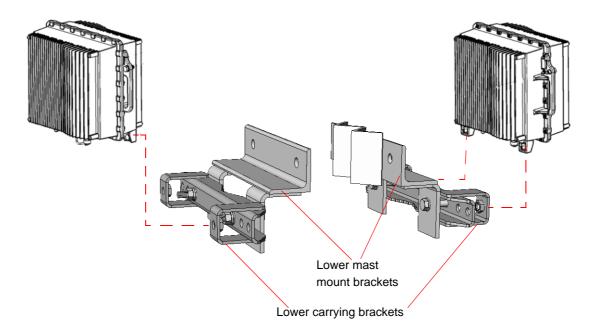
Assembling the Lower Pole Mount Brackets and Lower Carrying Brackets
